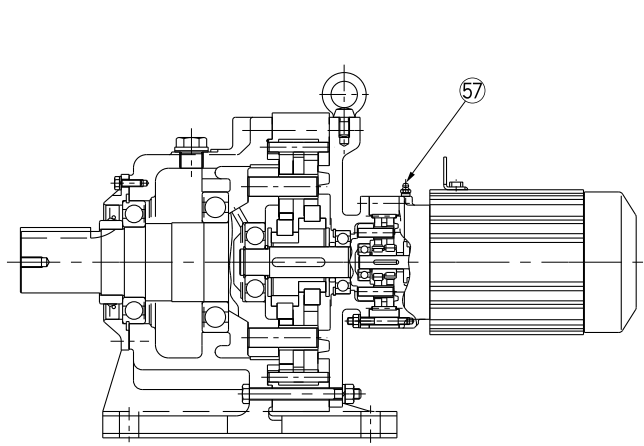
Type CHHM (Horizontal, Gearmotor)
